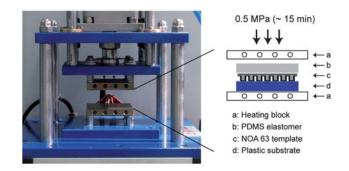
Photo of the custom-made pneumatic press machine and a schematic for the hot embossing process performed at 0.5 MPa for 15 min.
